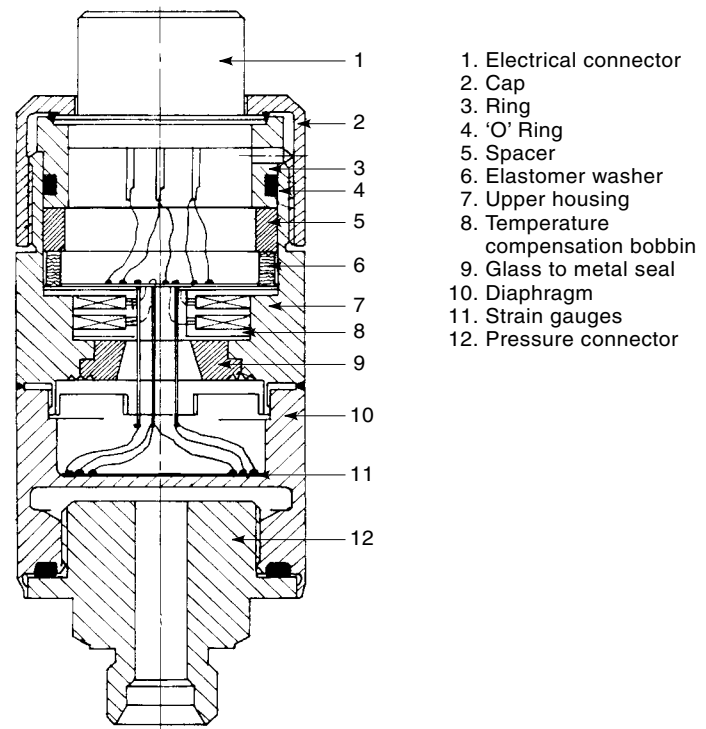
Cross-sectional view of pressure transducer assembly (from Ref. 33).
